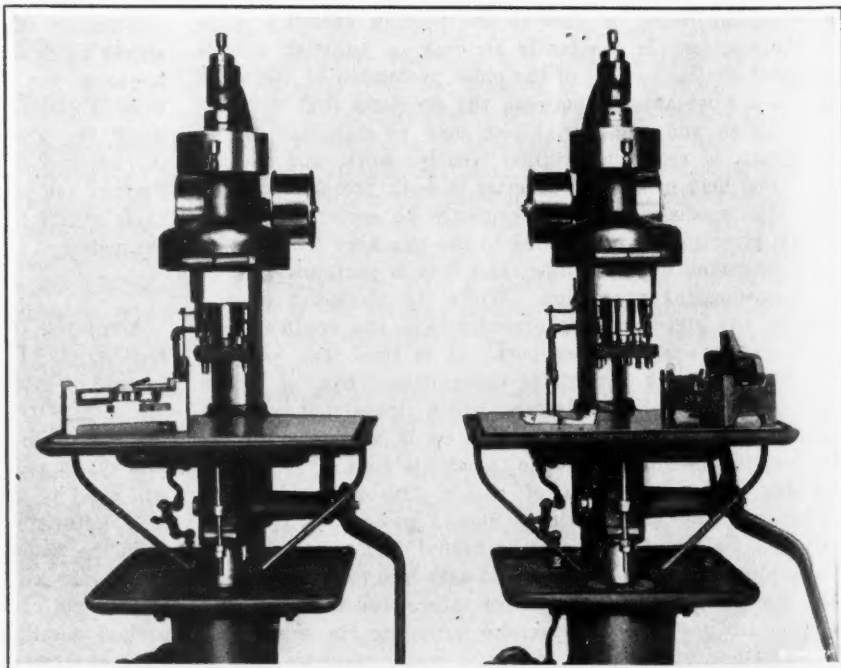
Langelier Multiple Drilling Machines used in Couples for drilling, reaming and counterboring Holes in Floor-plate of Rifle Receivers
